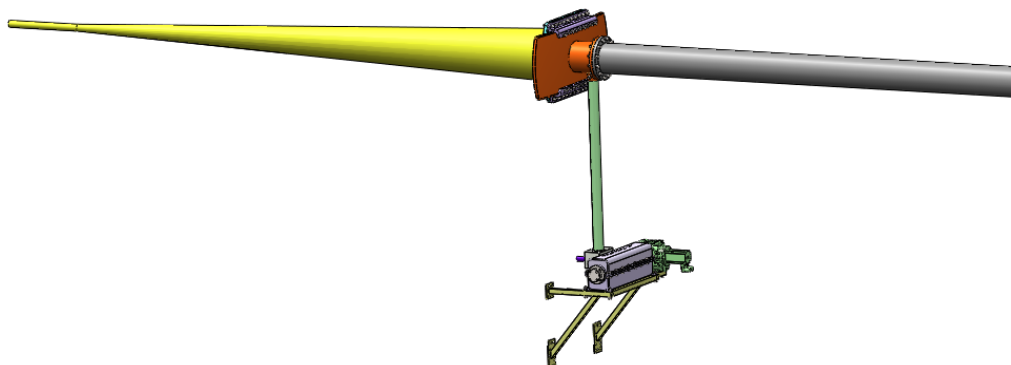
Design of tilting mechanism with spheric-shaped workpieces
